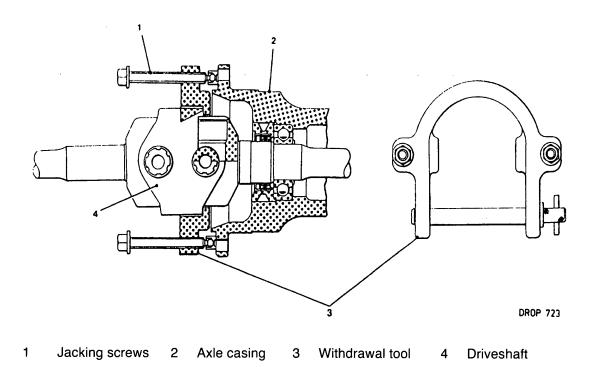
Withdrawing the driveshaft assembly from the axle casing
